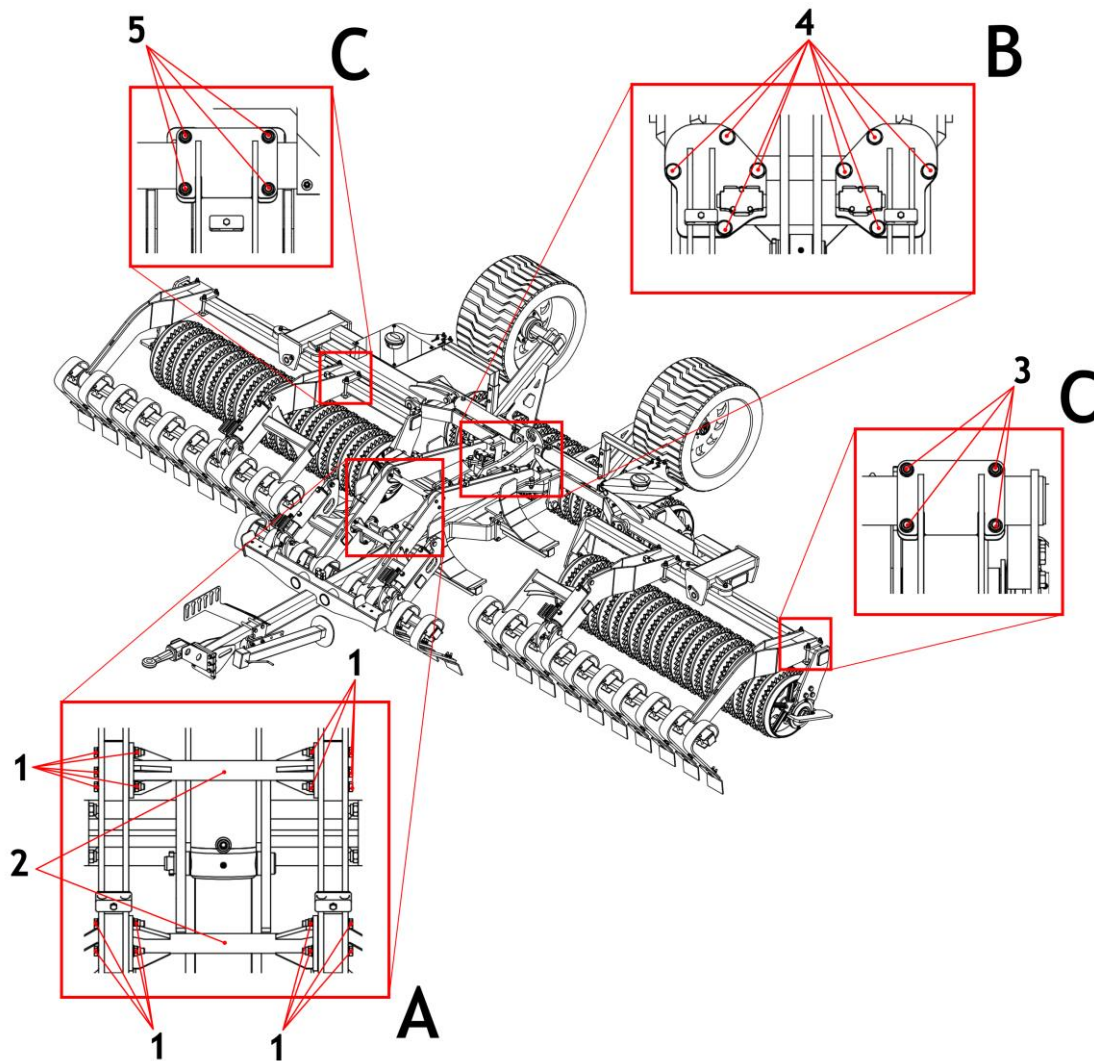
Mounting points for the leveling harrow on the cultivator roller MCB 6,2 H (1,3,4,5 - mounting bolts, 2 - connecting beams)
